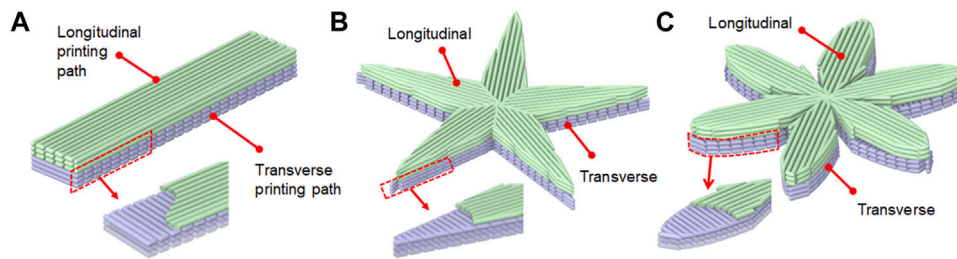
| Programmed printing paths of bilayer specimens (A) Rectangular bar (B) Star-shape plate (C) Flower-shape plate.
